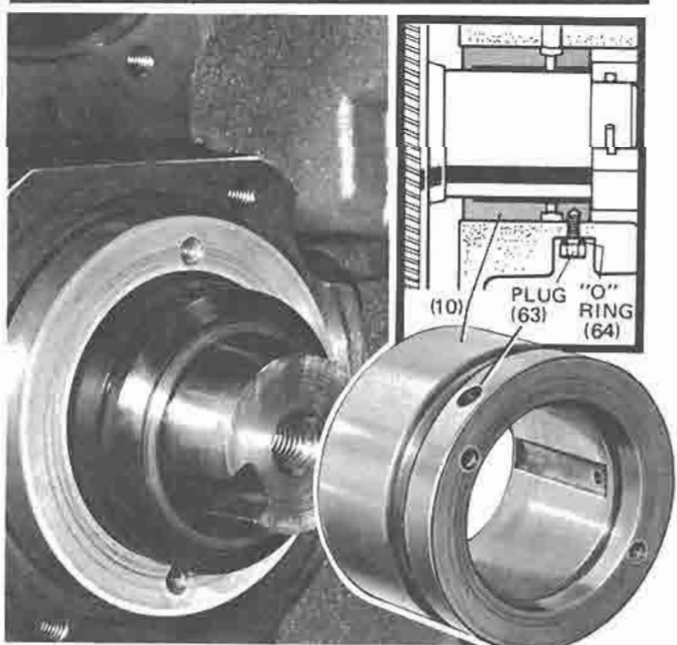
ASSEMBLING REAR LOW SPEED GEAR BEARING
